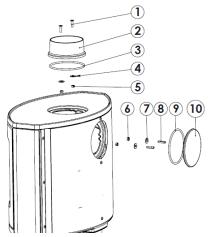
Disassembly of the rear bottom cover and the top connection collar
